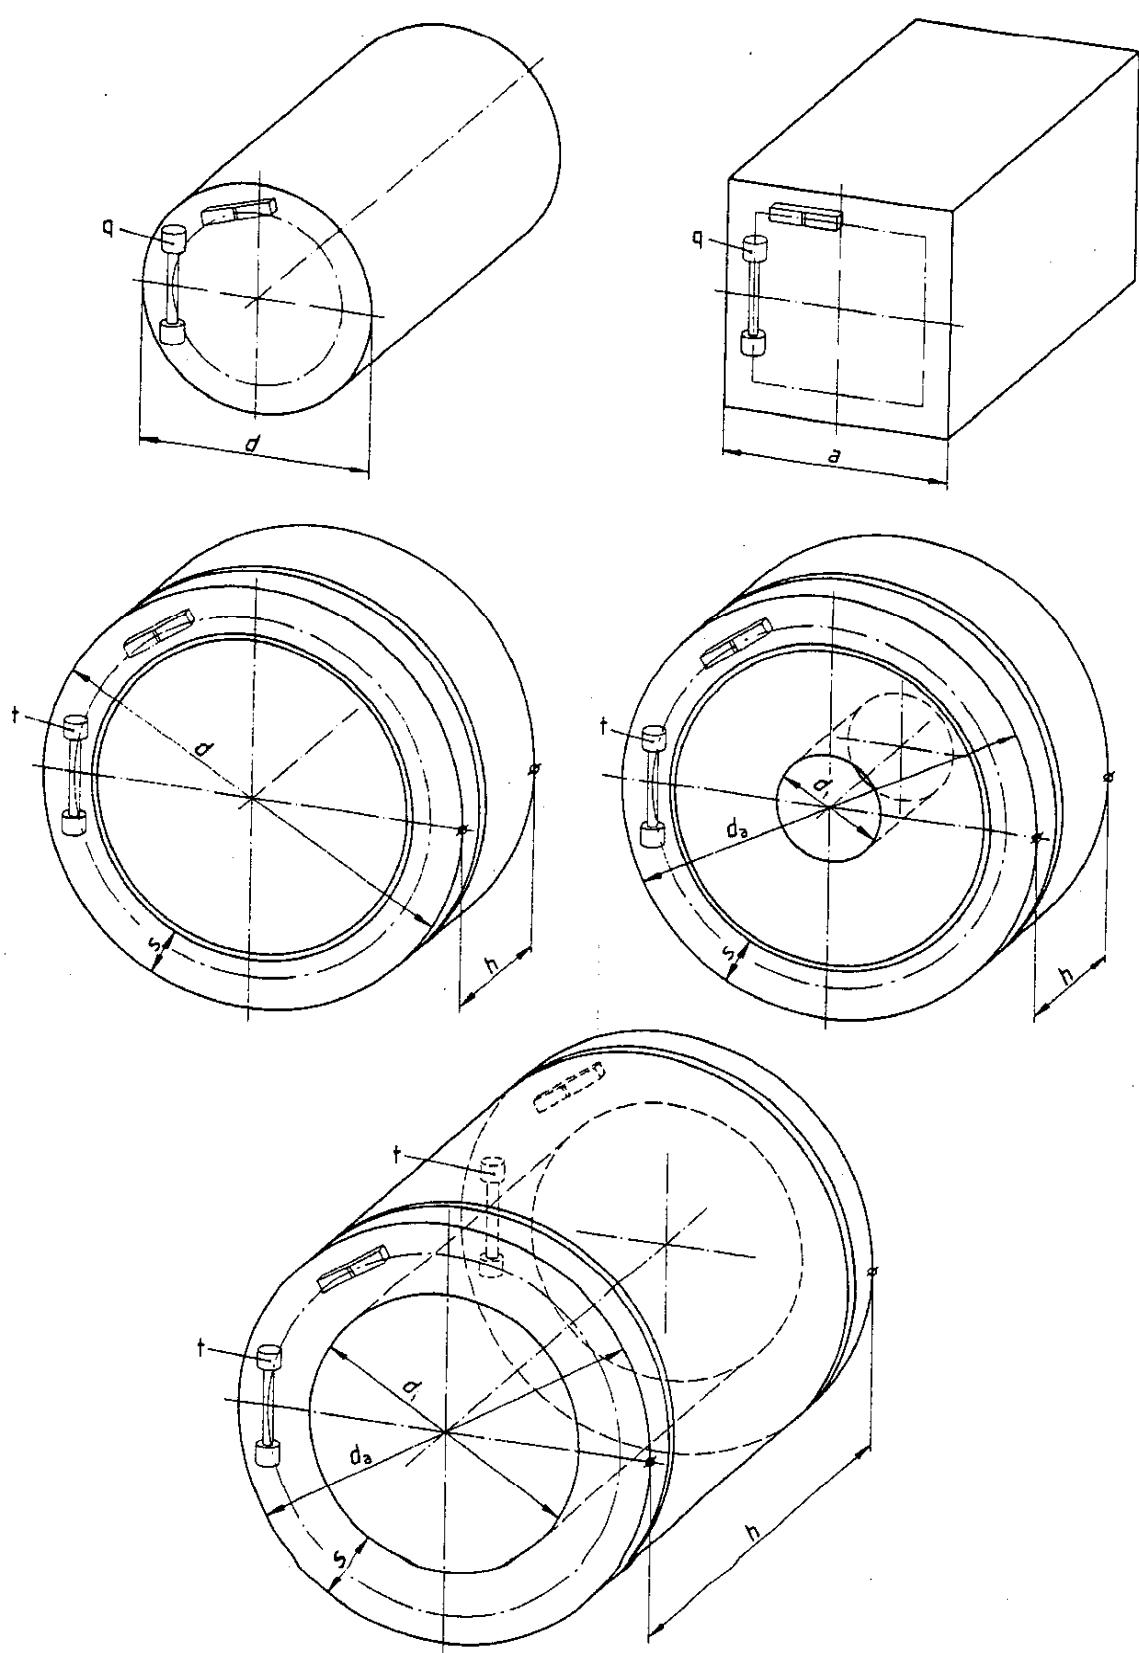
Dimensions and locations of test pieces to be considered in the case of bars with a diameter or thickness of 160 mm and over, and in the case of simple forgings
